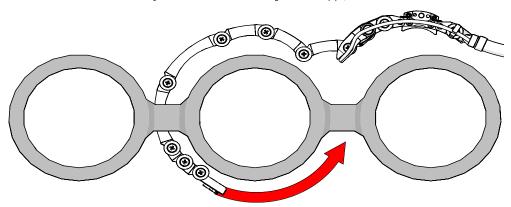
Pivot scanner while rotating links around pipe/tube
